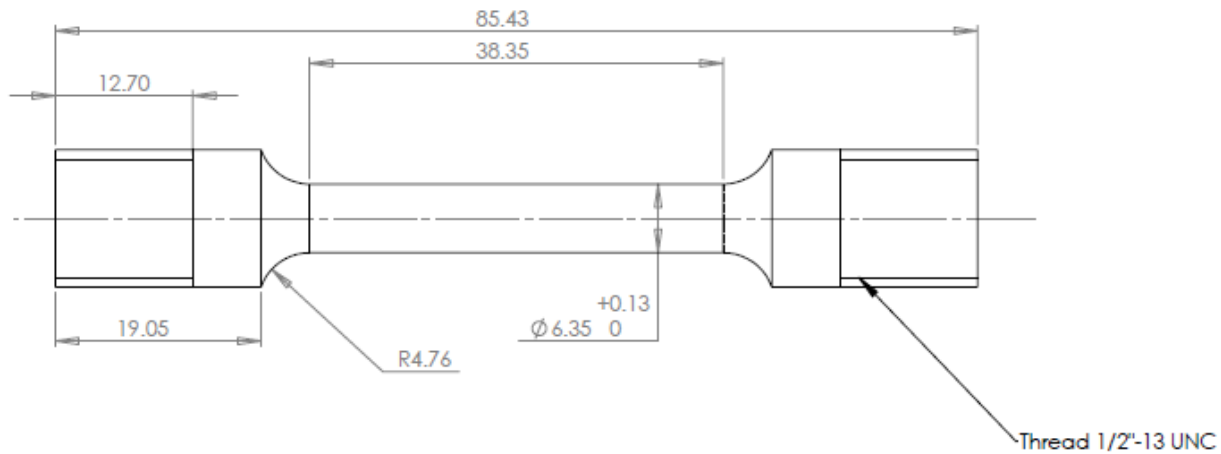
Drawing of tensile specimen. Dimensions in mm except the thread callout which is imperial to match the test frame grips.
